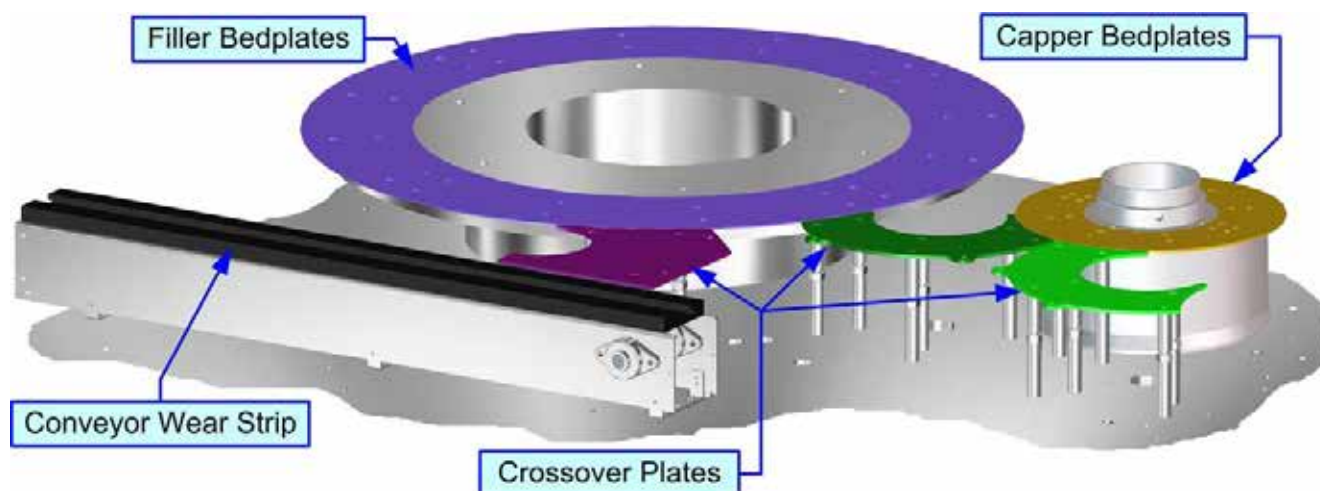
Crossover Plates, Bedplates, and Conveyor Wear Strips
